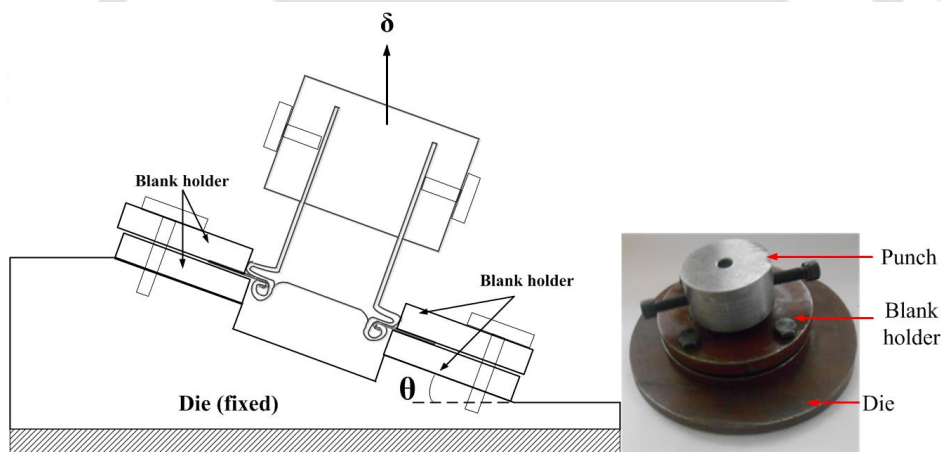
Schematic and experimental set-up fabricated for pull-out test
